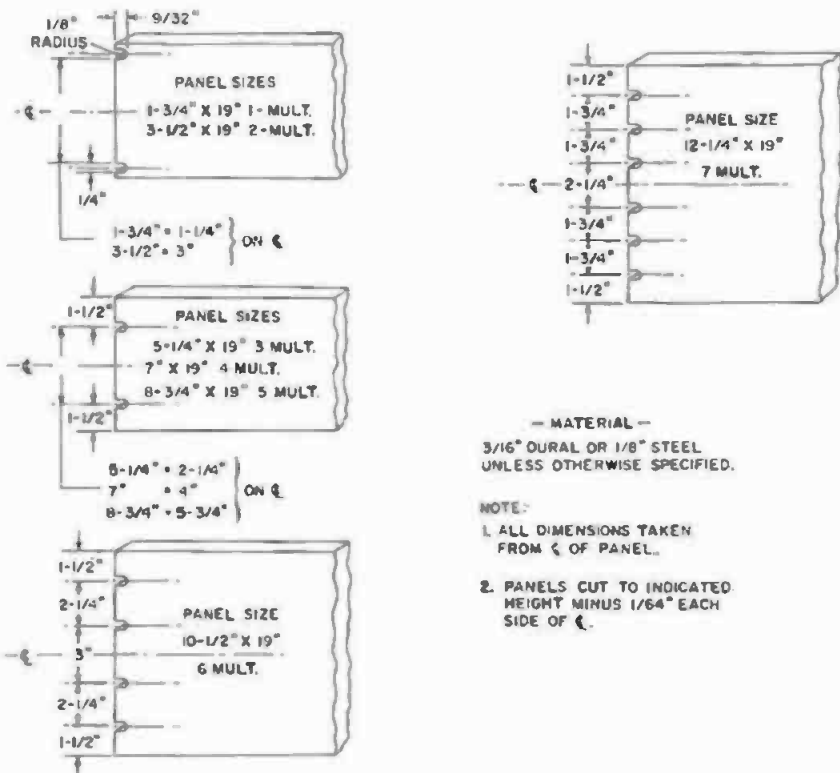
Dimensions for cutting and notching panels for relay mounting. The panels are cut in multiples of 1/4 inches high and 19 inches long.
